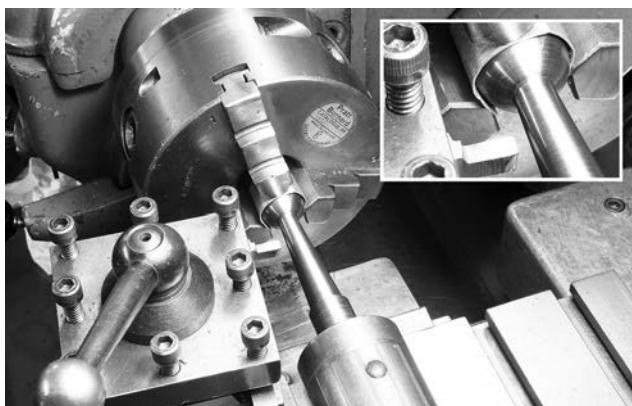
Making a two-ball handle, this one being the ball handle used for the spherical attachment itself as shown on drawing sheet 8
